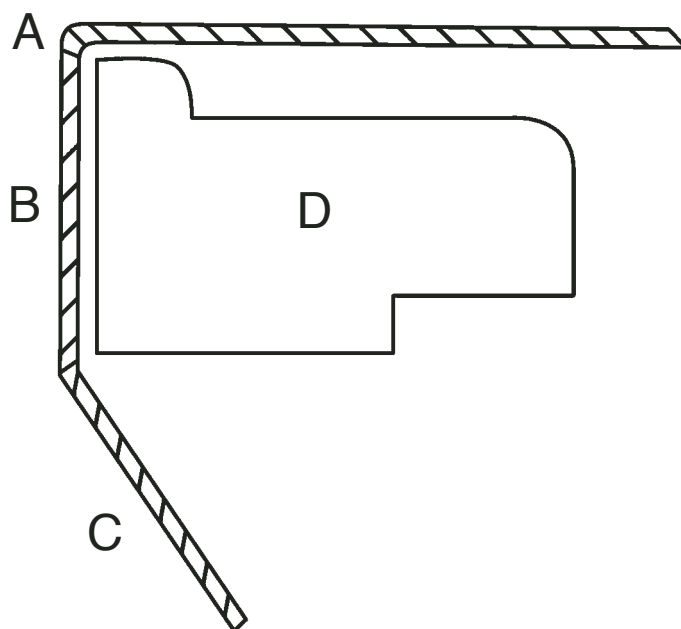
A=Bead Edge, B=Tacking Margin, C=Jacking Margin, and D=Heavy Duty Single Side Bar with Backing Panel Recess.
